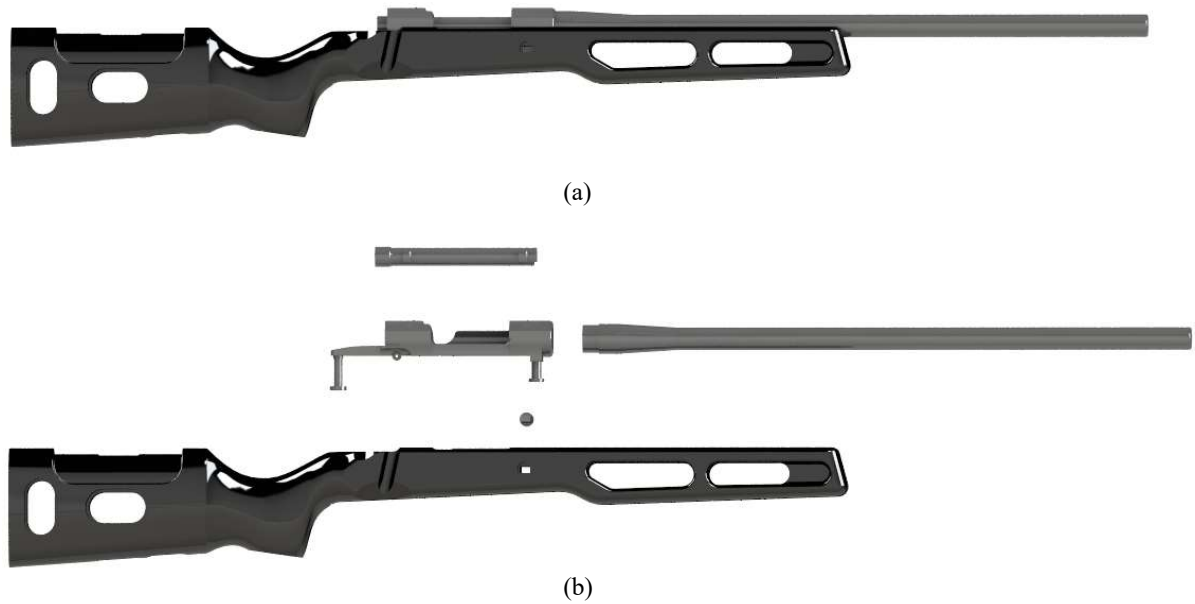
CAD geometry of the Mauser-type mechanism assembled onto the chassis (a). Exploded view highlighting the assembly and the simplification of the components (b).
